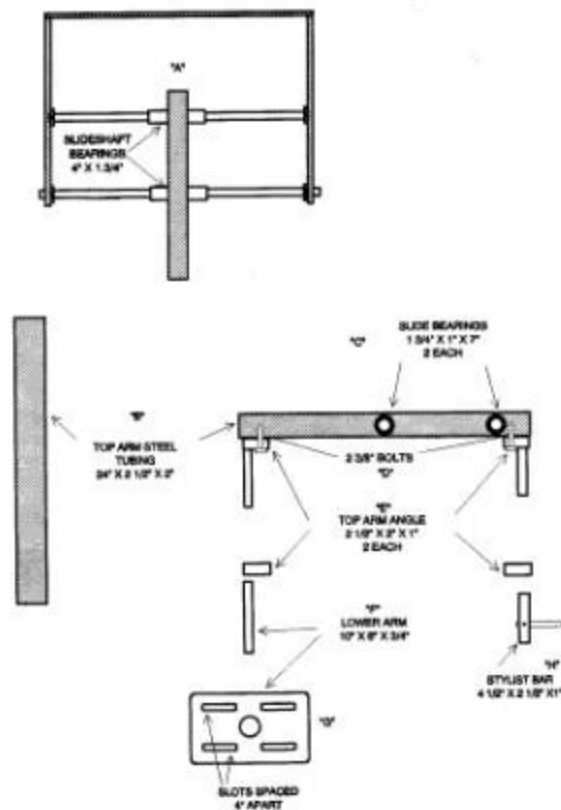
ROUTER AND STYLIST ASSEMBLY
